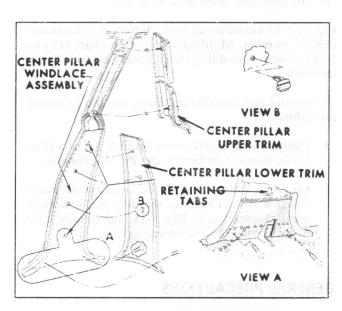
Center Pillar Trim Attachment - Typical Installation
